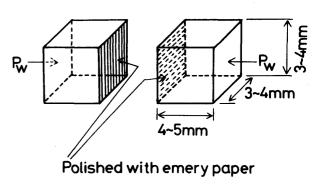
Dimensions of the base metals used and their configuration for the electric resistance measurement of bond. P_W denotes welding pressure.
